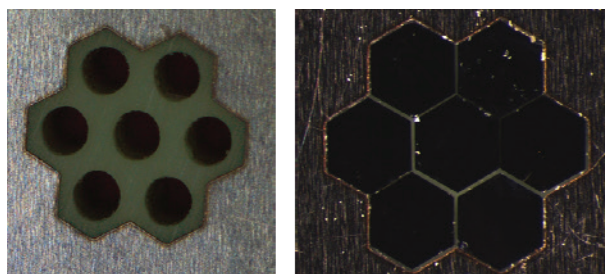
Top down view of printing fixture with vacuum holes and polymer visible on the left, then with the mirrors placed on the right.
